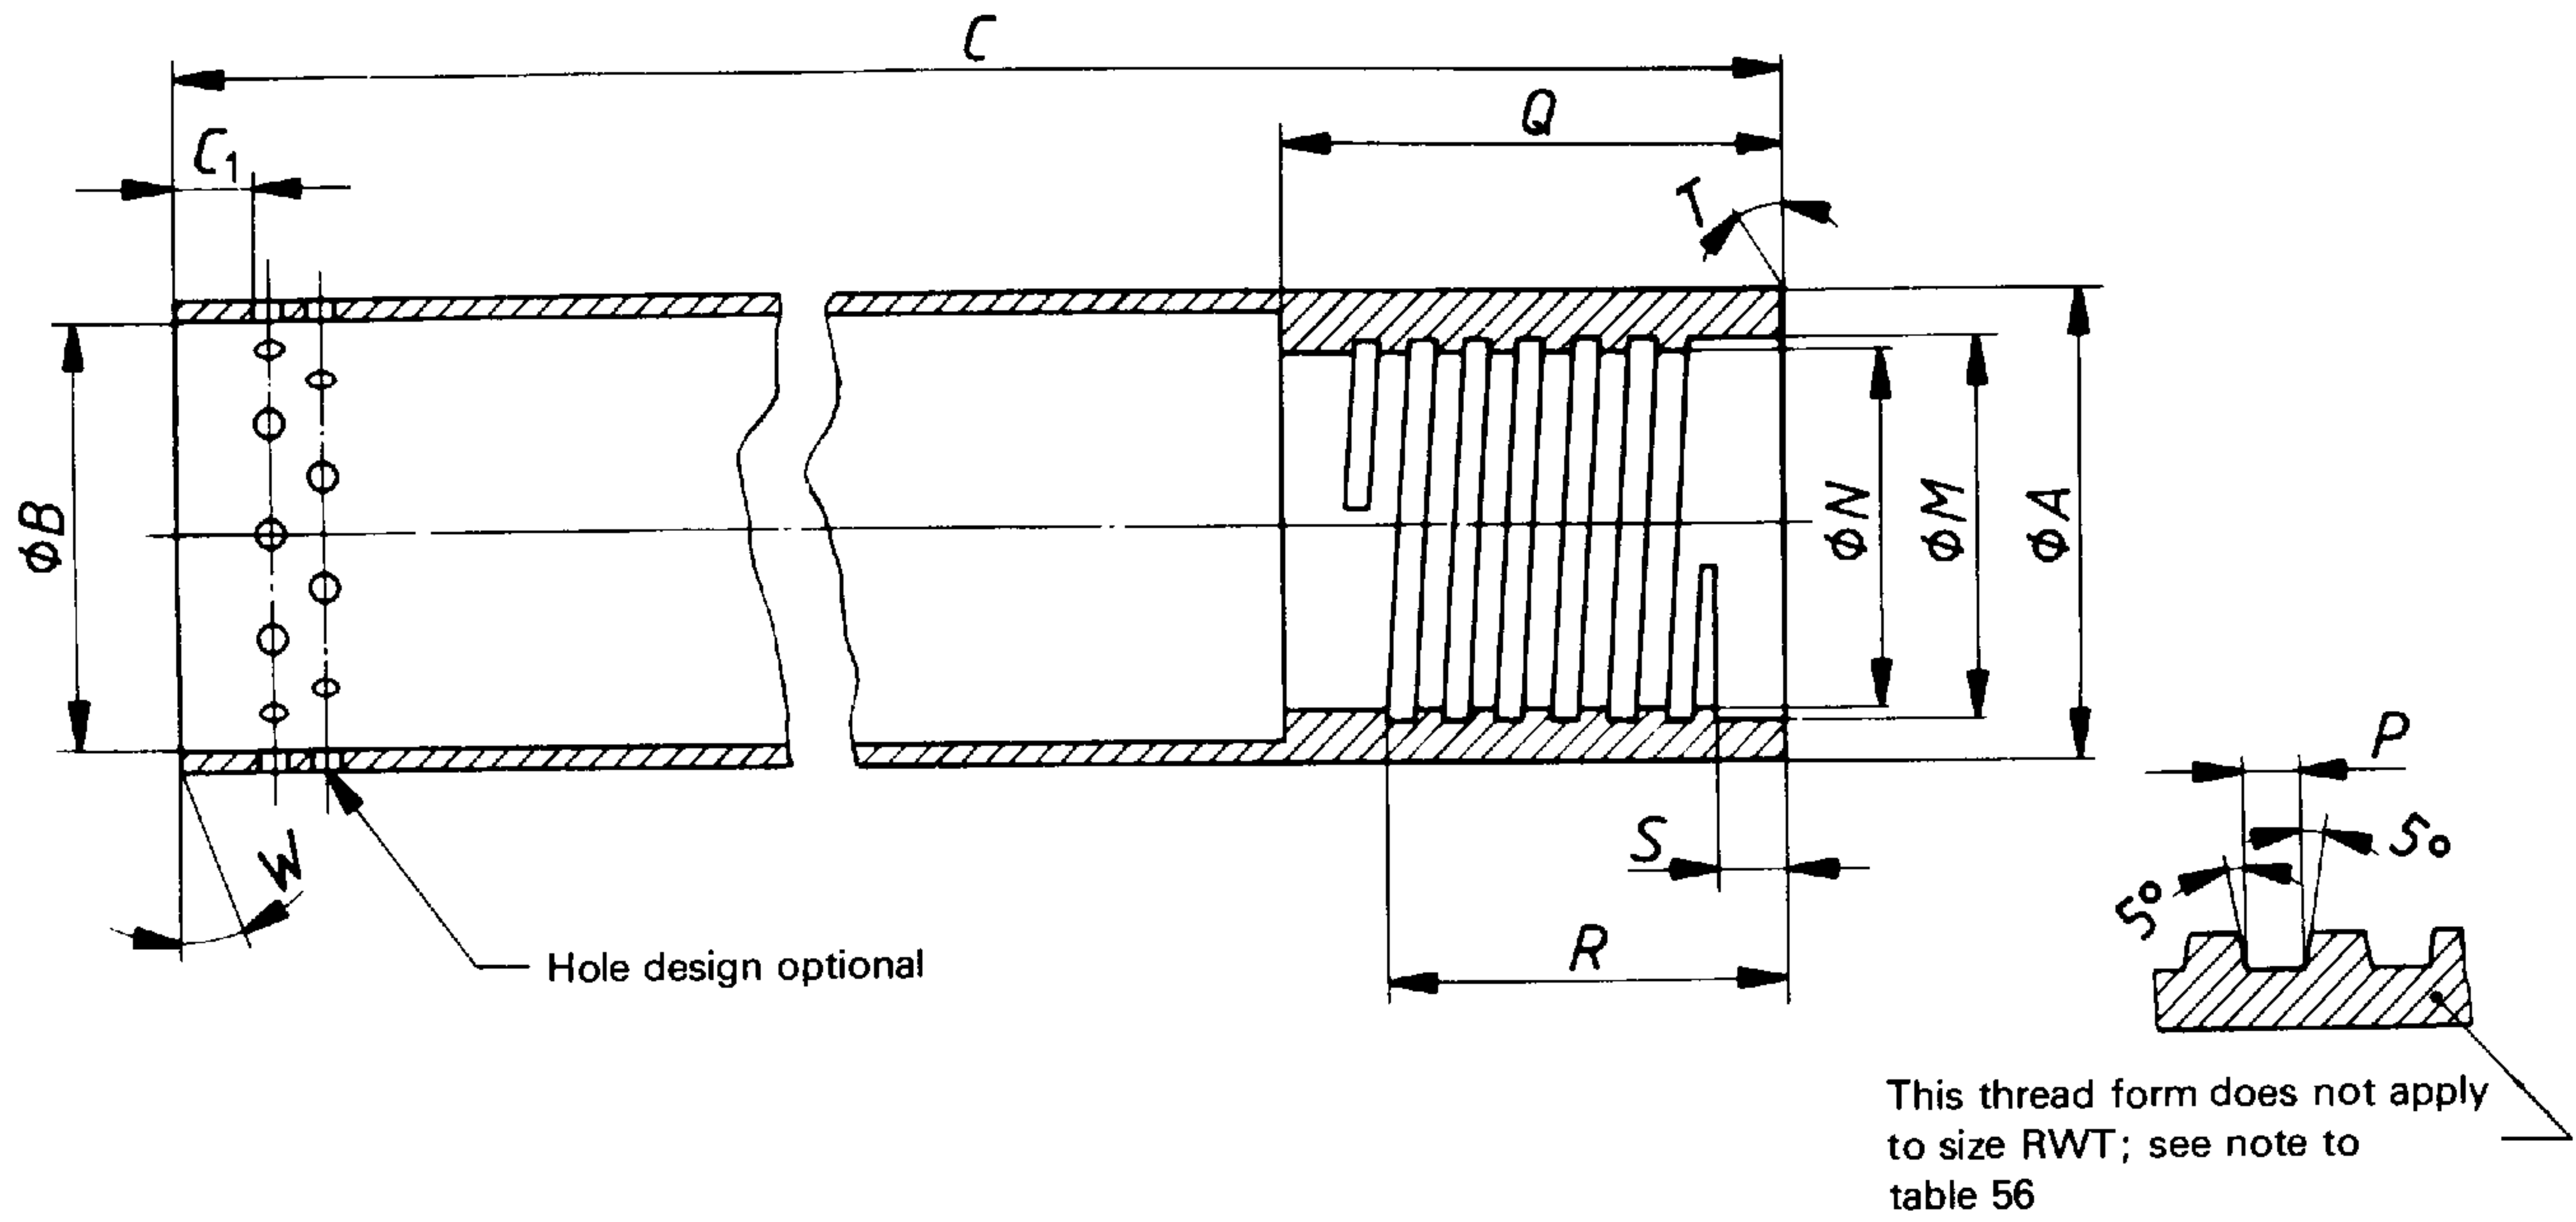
“WT” design double-tube core barrel – Inner tube (see table 56)
